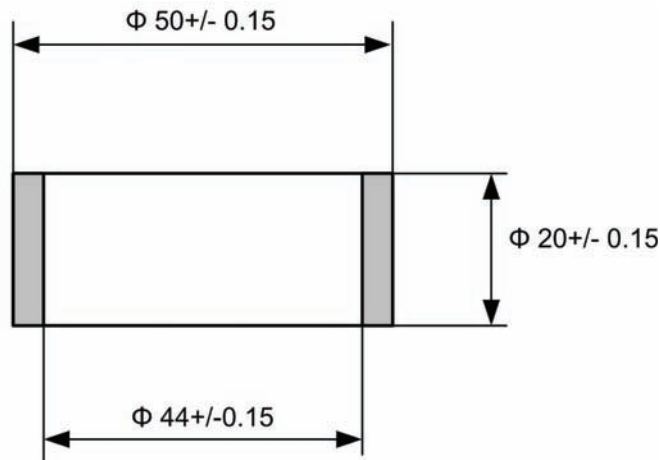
Drawing A – drawing sizes - all dimensions are in mm
